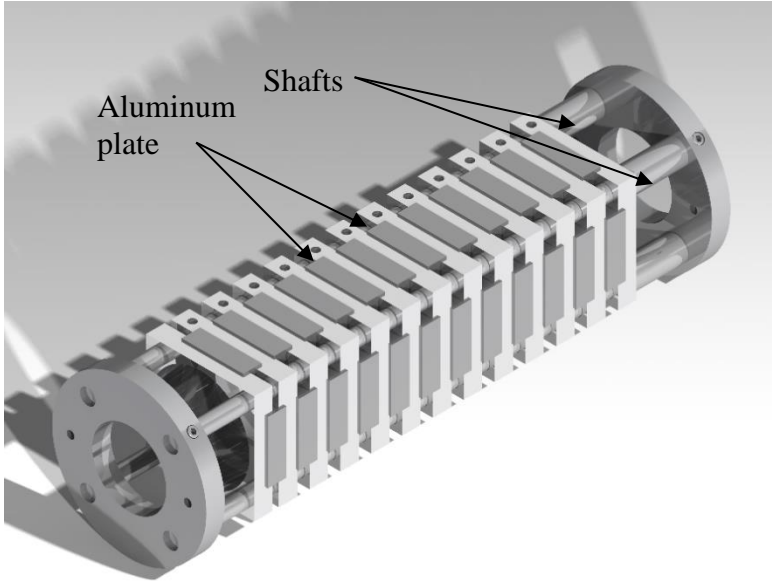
3. A frame to hold the ferromagnetic pole-pieces
